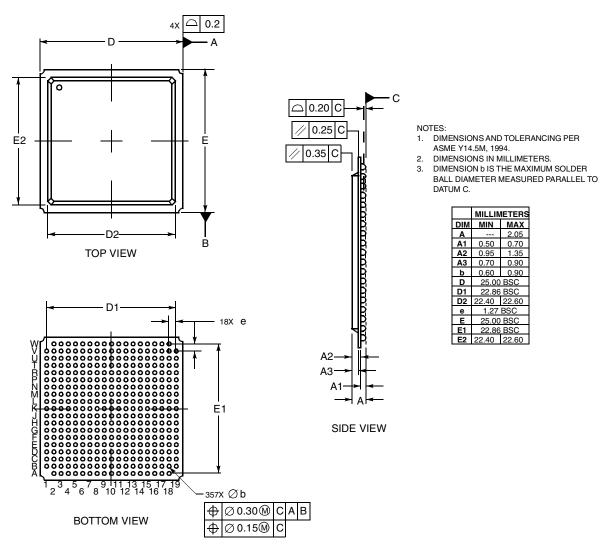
MPC8241 Package Dimensions and Pinout Assignments (ZP Package)
